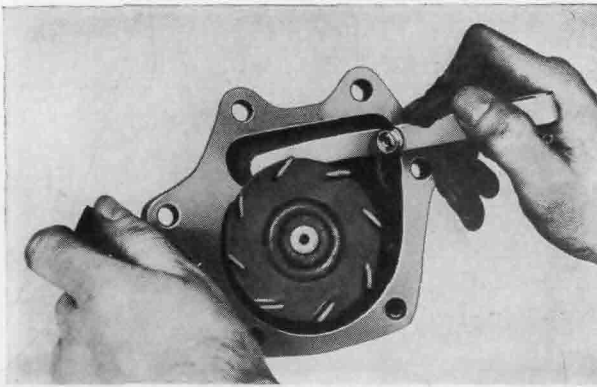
Measuring clearance between face of rotor and pump body. (Chevrolet Motor Division of General Motors Corporation)
